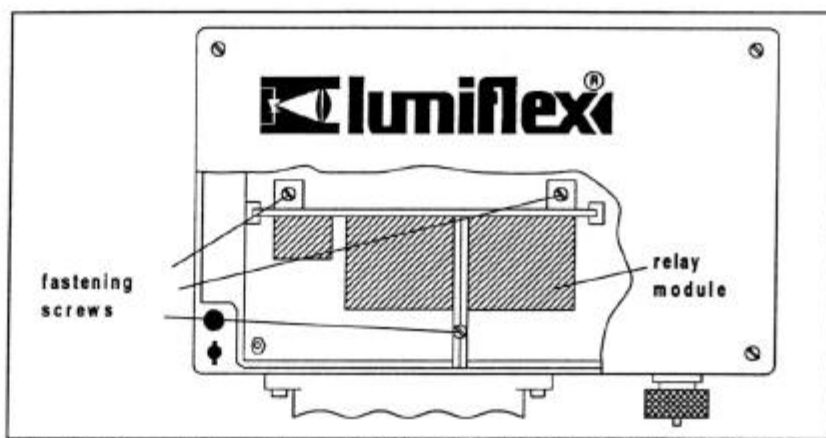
To remove the relay module, unscrew the three fastening screws.
